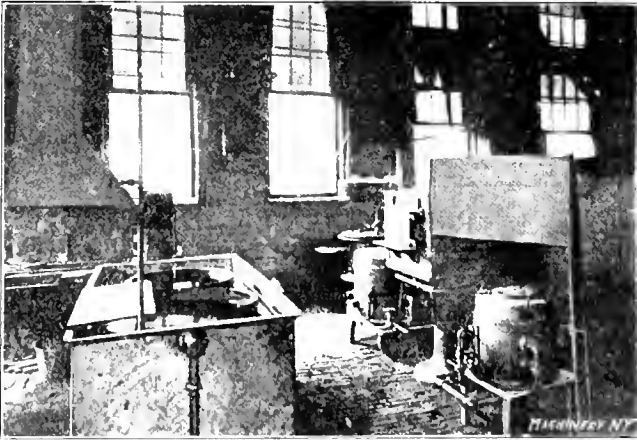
Barium-chloride Hardening Furnaces and Cooling Tanks
